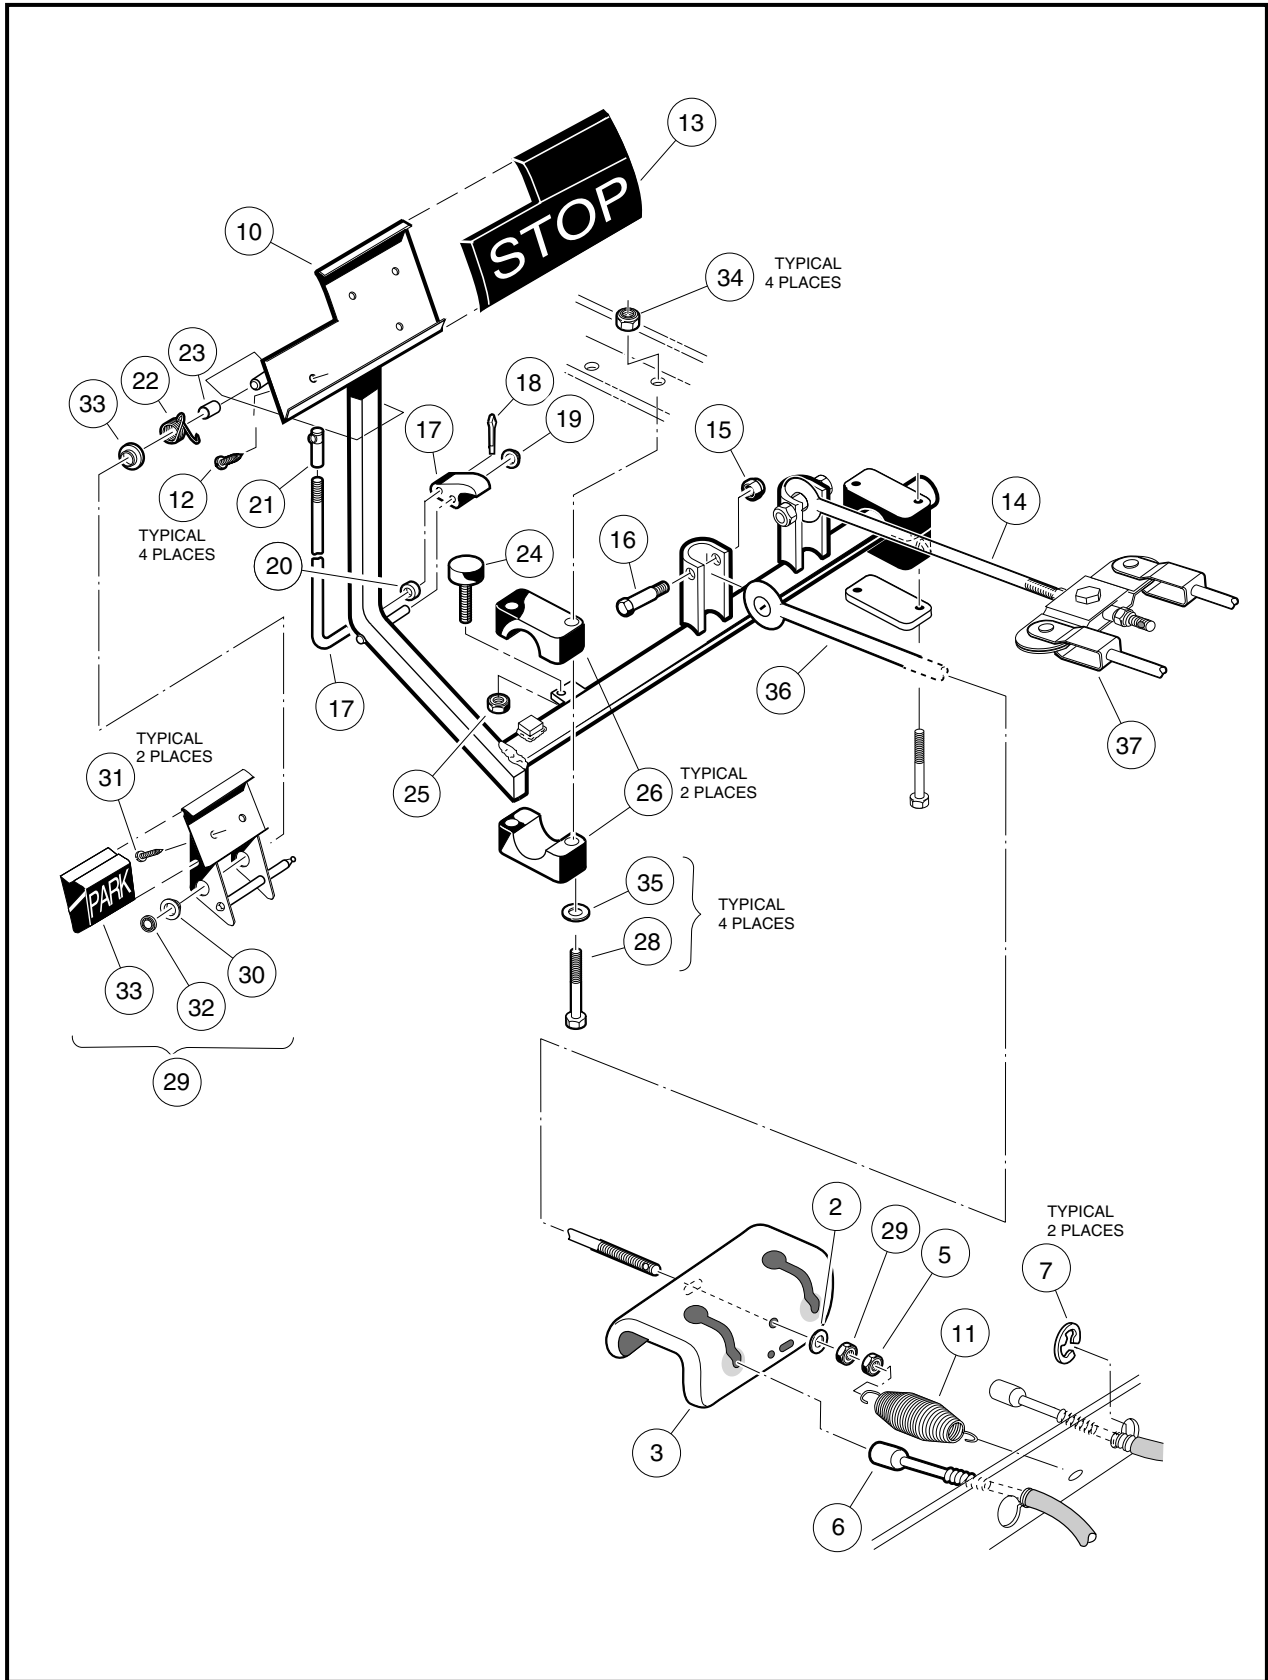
Brake and Park Brake Pedal Assembly and Mounting – Four-Wheel Brake Vehicles
